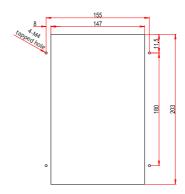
Mounting bracket dimensions and hole spacing for 0.4–3.0 kW AC drive models
